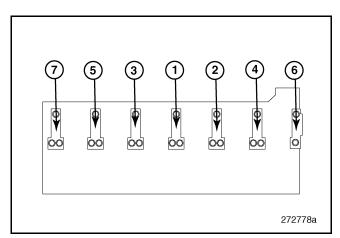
Rocker Arm Shaft Fastener Loosening Sequence
